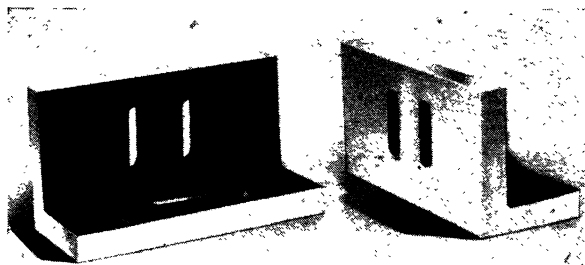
Angle irons. (Courtesy of Taft-Feirce Manufacturing Company.)
